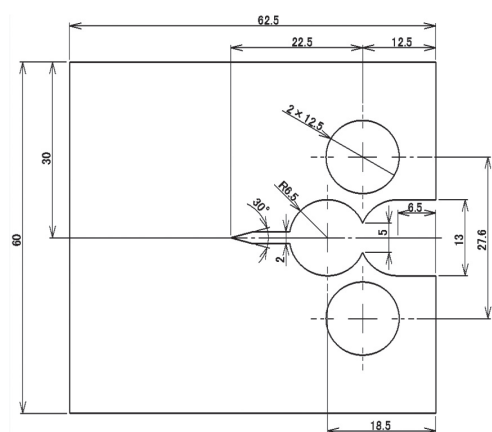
Configuration and dimensions of CT test specimens. (B=25mm)
